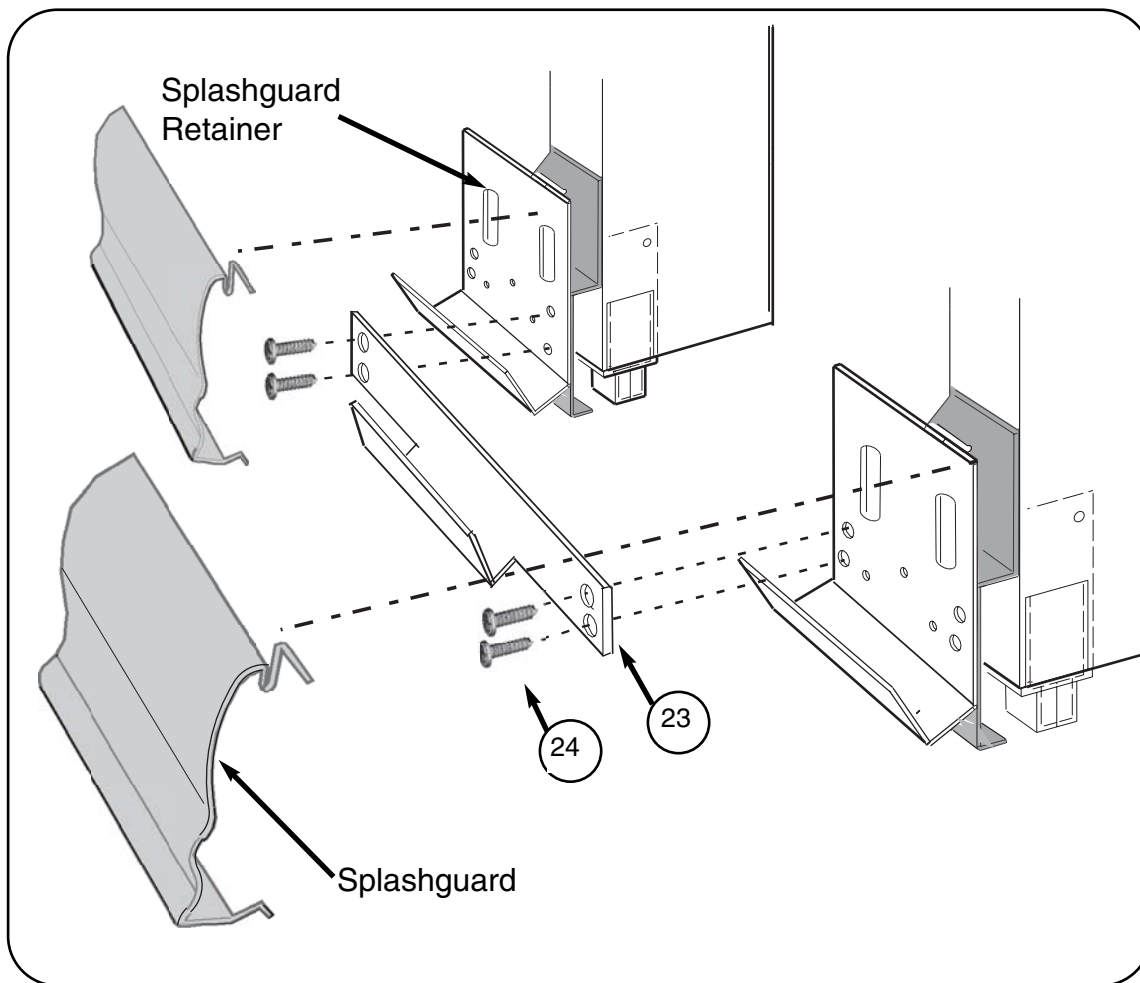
Installing the Splashguard Joining Bracket and Splashguard
